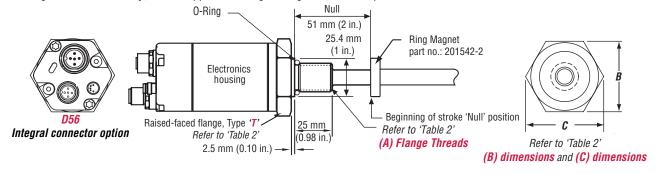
Model RH Rod-style sensor dimension reference (Shown with the D56 Integral cable connection type option)
